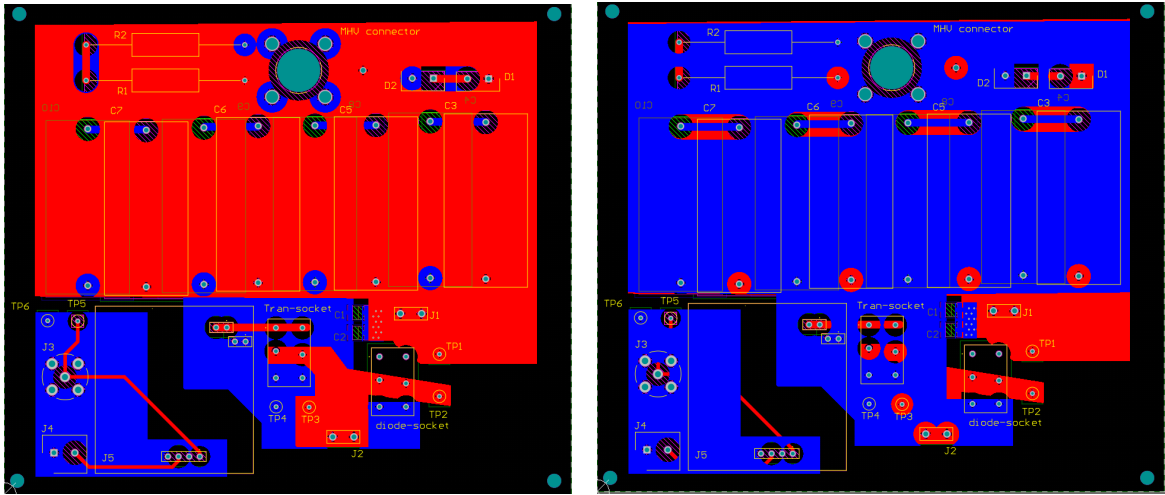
(Left) The top view and (Right) the bottom view of PCB layout for the UIS test board.
